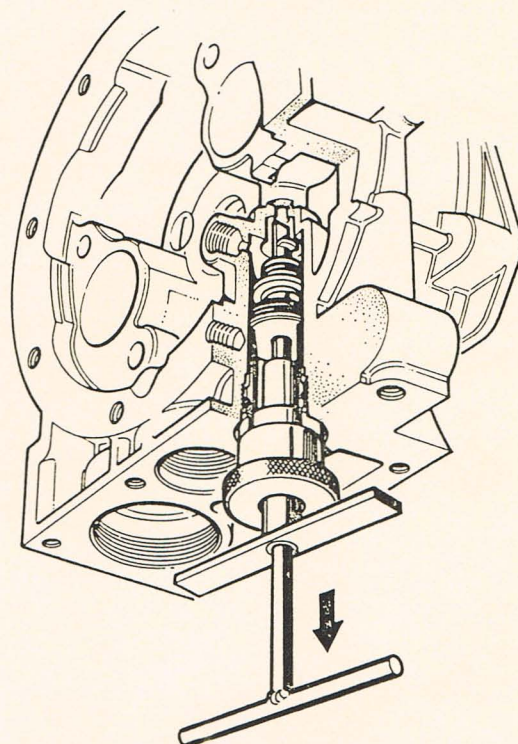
REMOVAL OF RELIEF VALVE BODY AND SLEEVE
